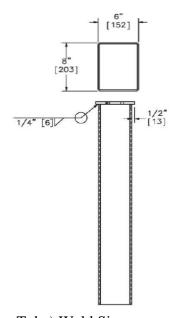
Lower Post (Foundation Tube) Weld Size
